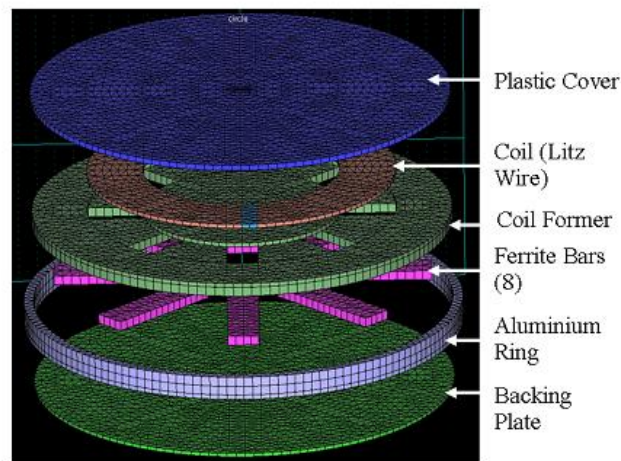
Exploded view of an IPT circular pad with ferrite bars and single-sided winding [95]
